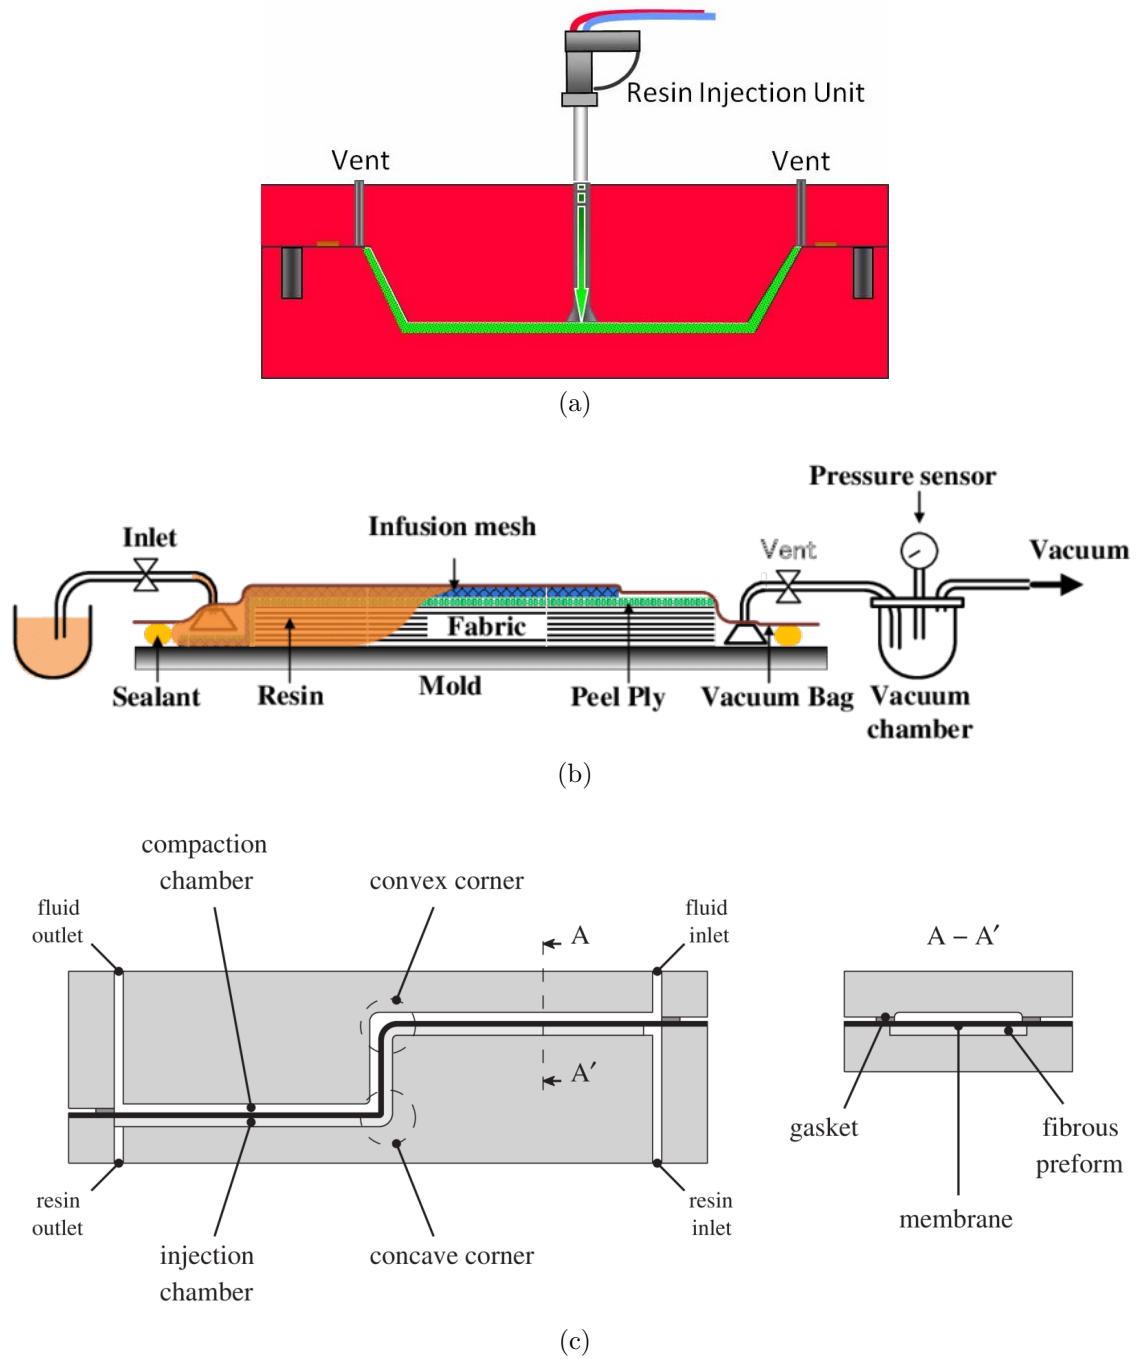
Various LCM methods: (a) Resin Transfer Molding (RTM) [1]; (b) Vacuum Assisted Resin Transfer Molding (VARTM) [2]; (c) Flexible Injection (FI) [3].
